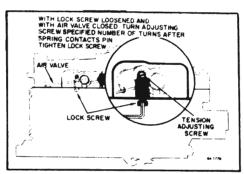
Air Valve Spring Wind-Up Adjustment
